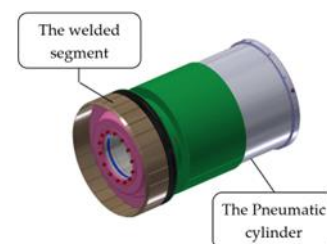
Pneumatic cylinder of the wrapping mechanism
